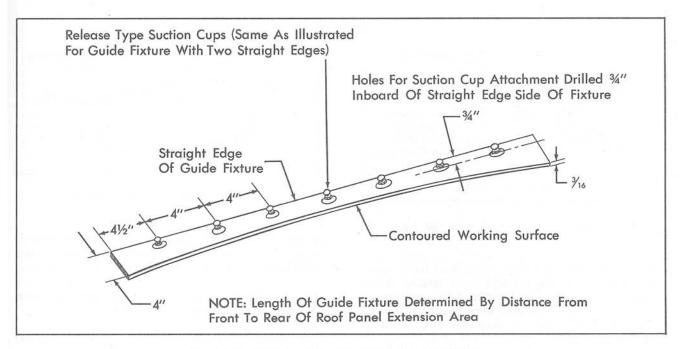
Roof Panel Sanding Guide Special Fixture
